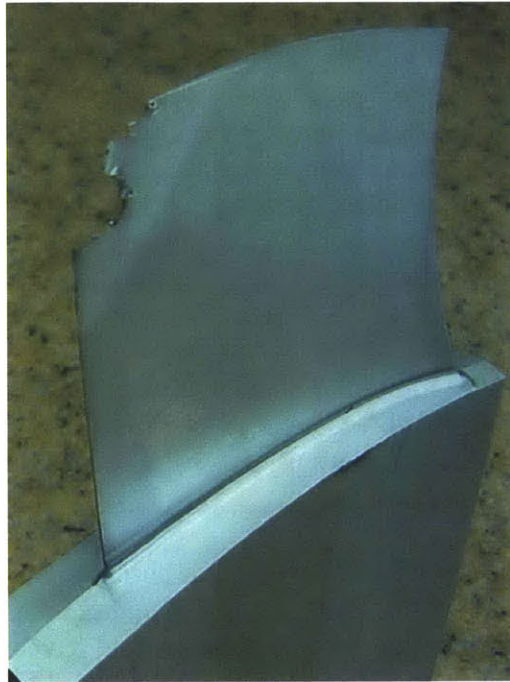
Aluminum test blade with section of leading edge due to distortion during welding
